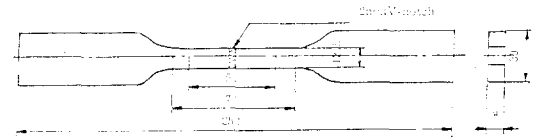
Tension test specimen of in-air welds and underwater welded joints
